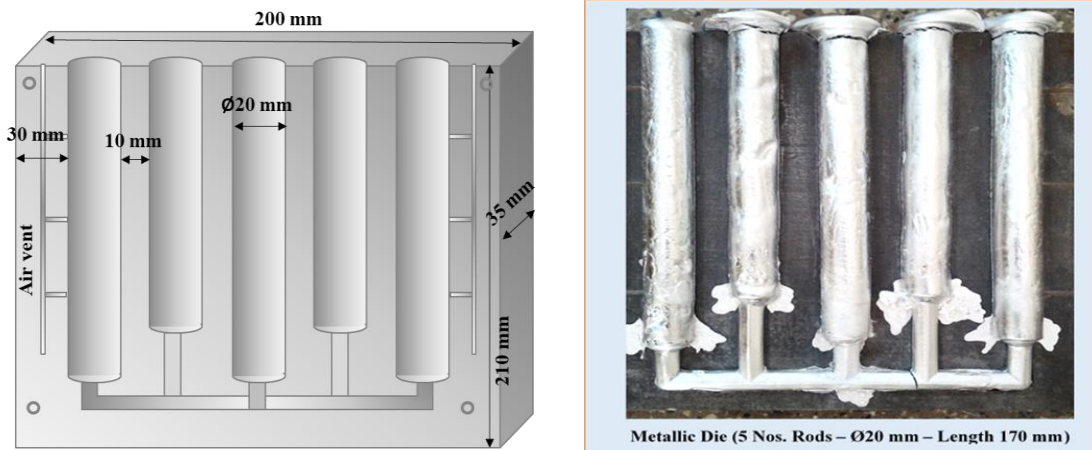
Schematic of metallic die (right), and solidified casting in the die (left).
